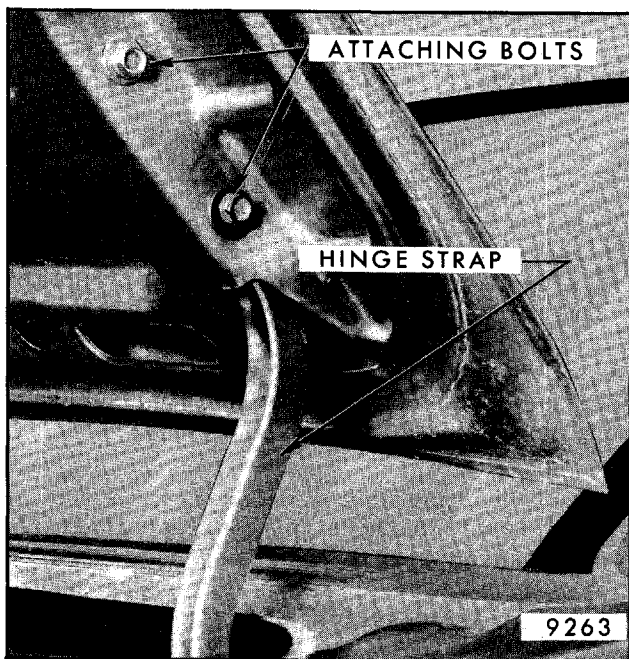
"B, C" Hinge to Lid Attachment
